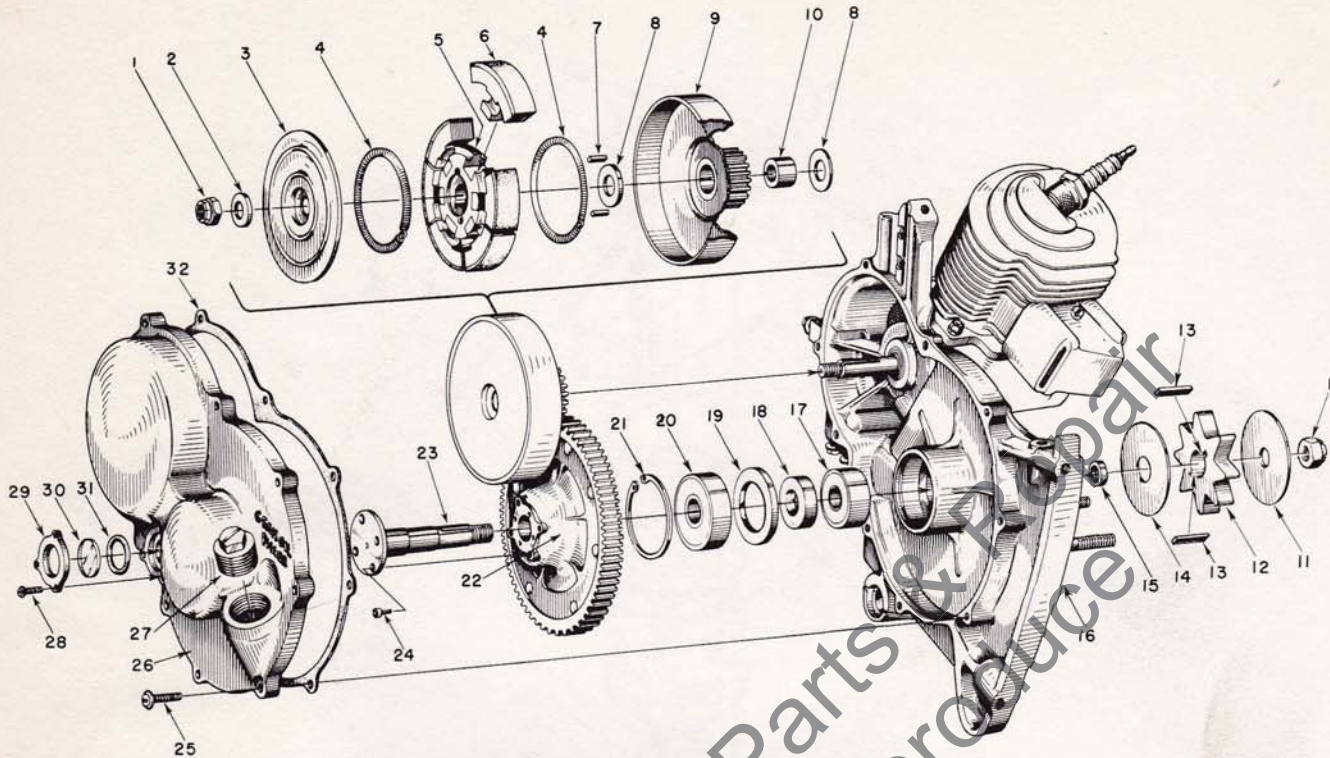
GEAR CASE AND SPROCKET PARTS
